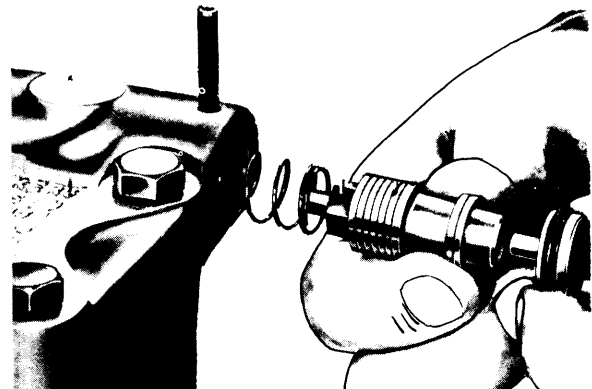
Removing Pump Control Valve Assembly (VT27 Shown)
